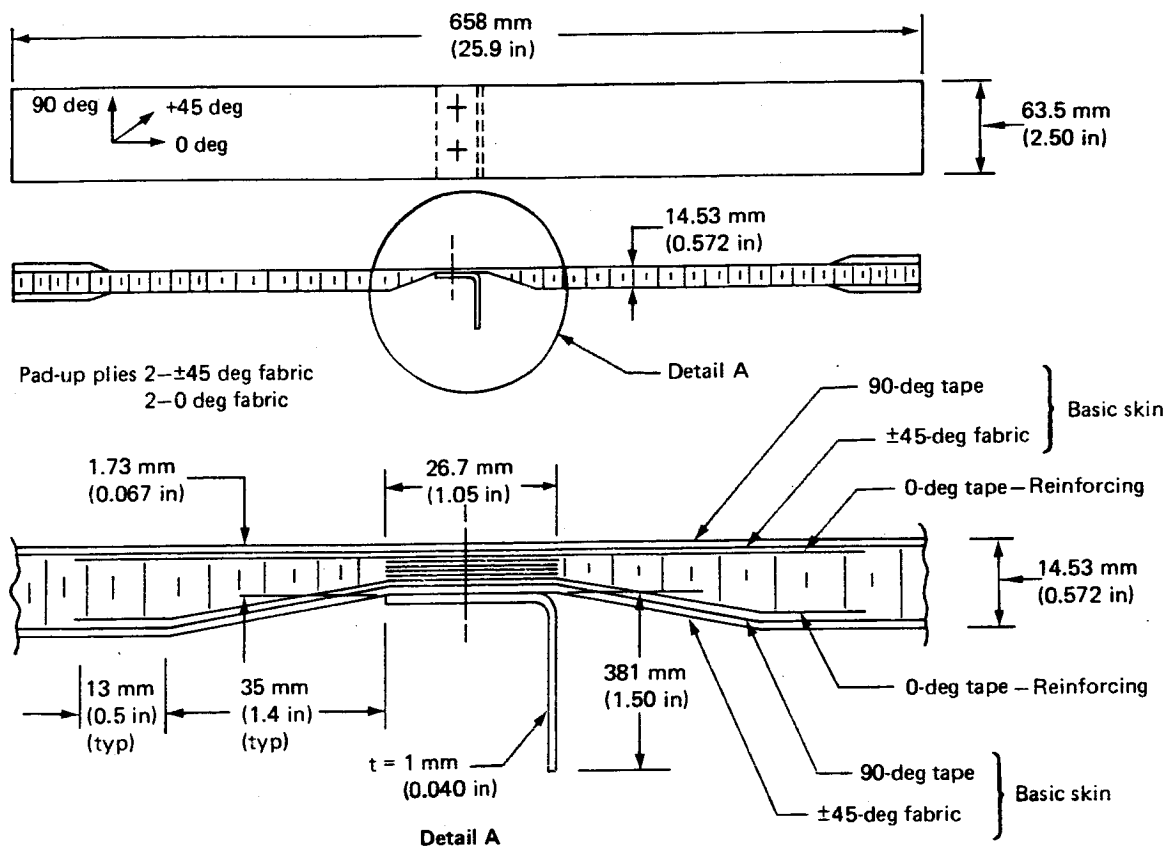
Cover Panel Padup Specimen Geometry (Test 8)
